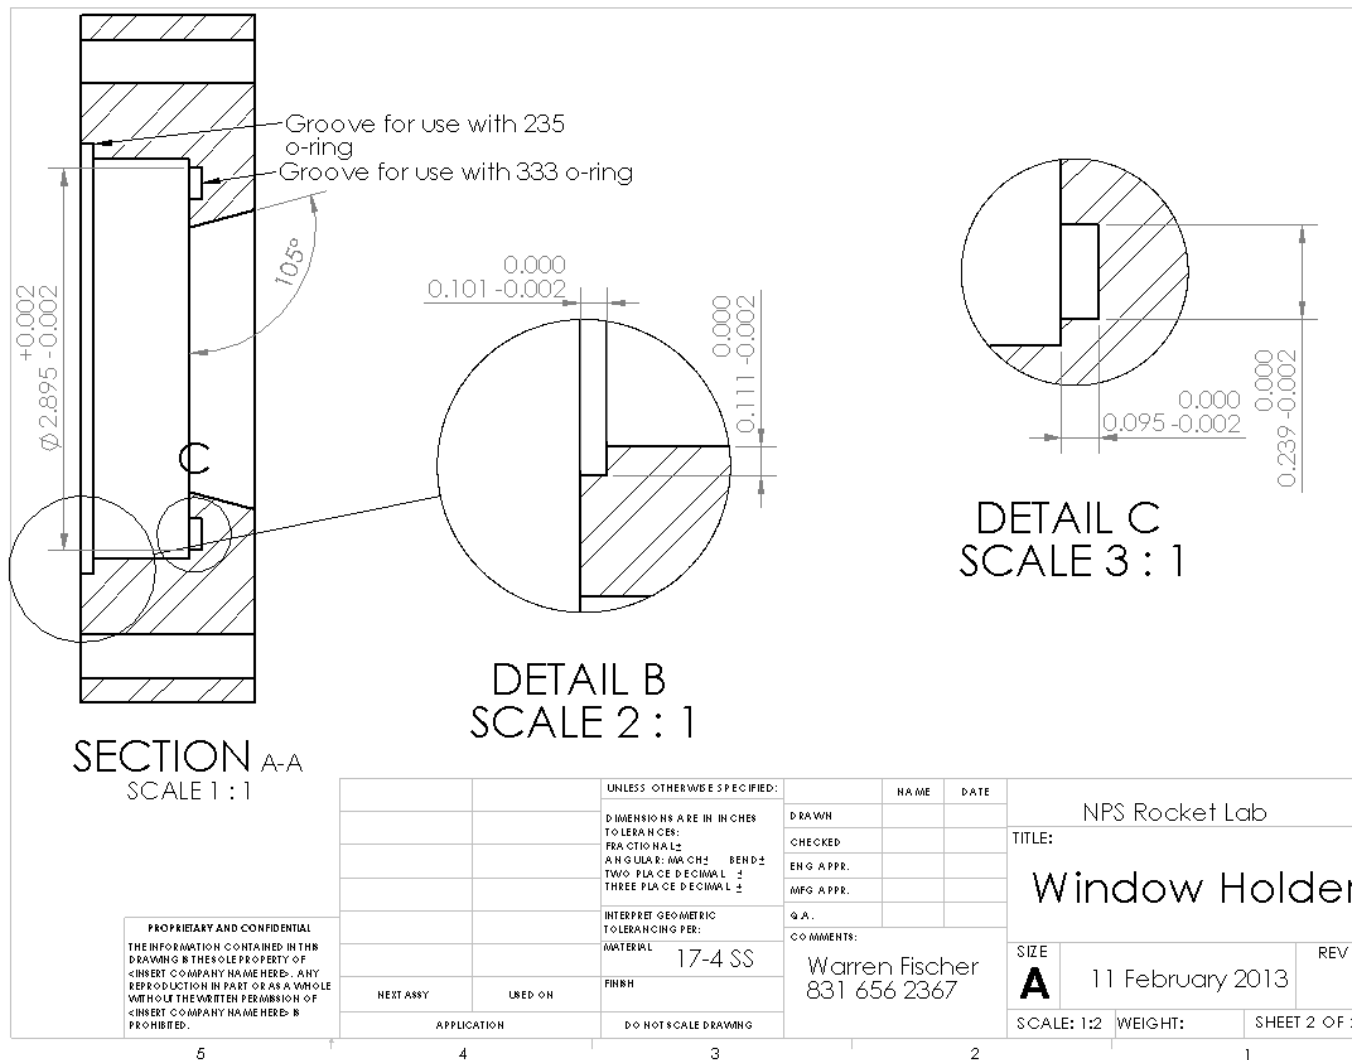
Optical Window Frame Fabrication Drawing (View 2 of 2)
